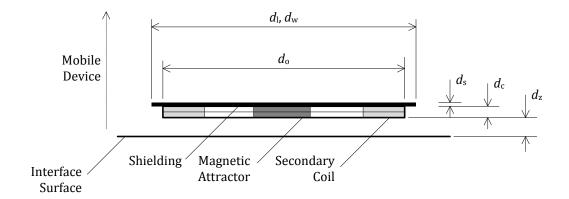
Secondary Coil and Shielding assembly of Power Receiver example 2
